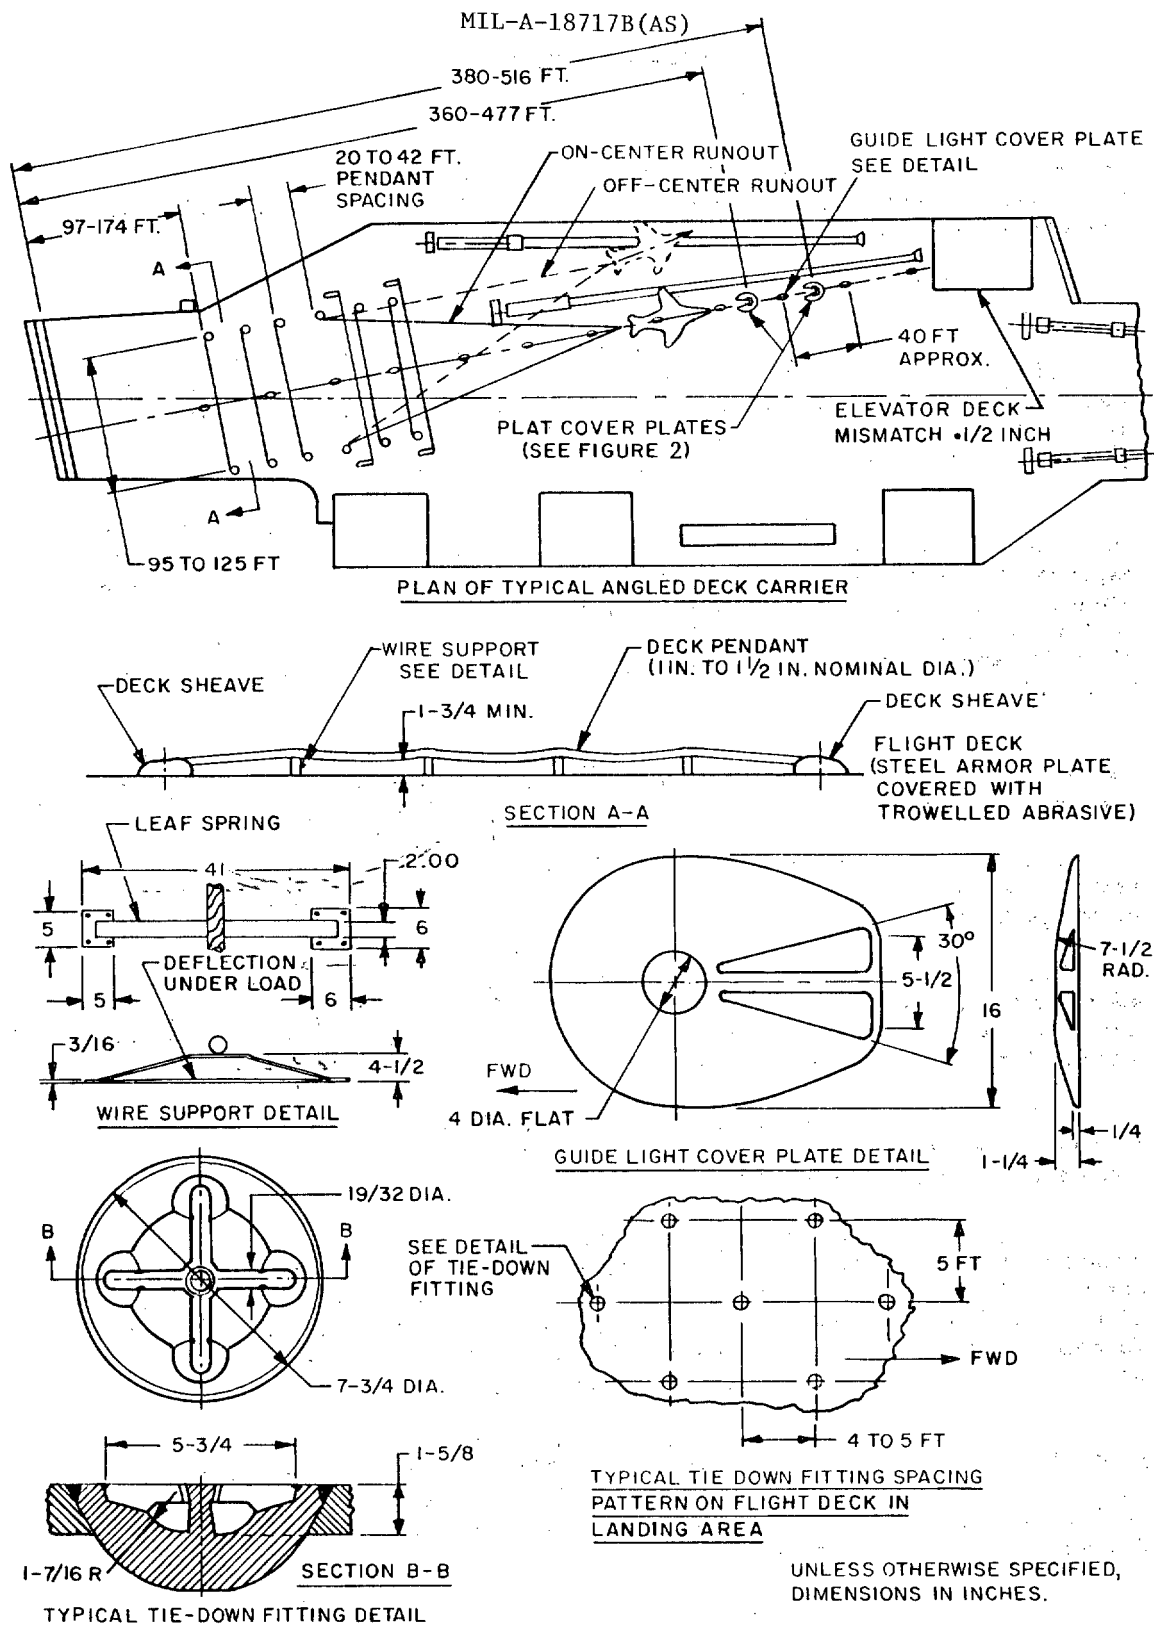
Typical Arrangement and Details of Arrested Landing Deck Area on CV Type Flight Deck
